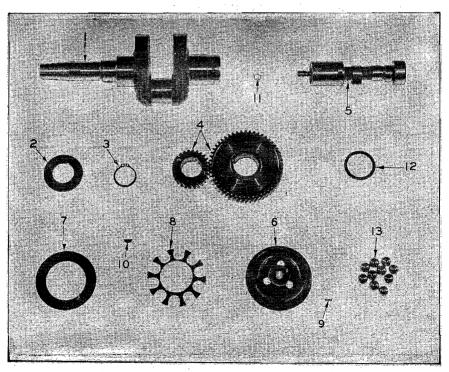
CRANKSHAFT AND CAMSHAFT GROUP
